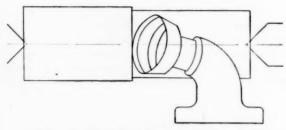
ROTARY TOOL MACHINING SHOULDER
